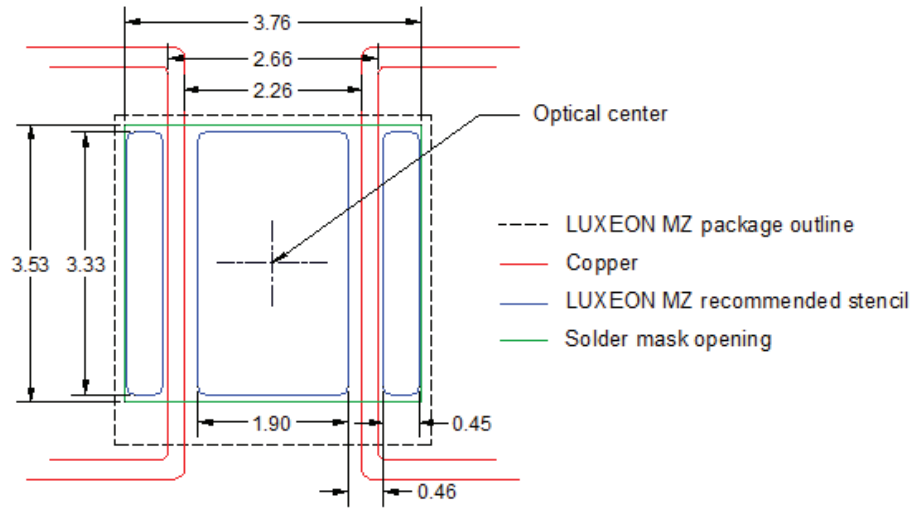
Recommended PCB solder pad layout for LUXEON MZ.
